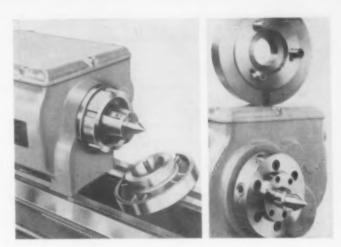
Lathe headstock equipped with taper key drive spindle nose. Fig. 2. Lathe headstock equipped with cam lock spindle nose.
